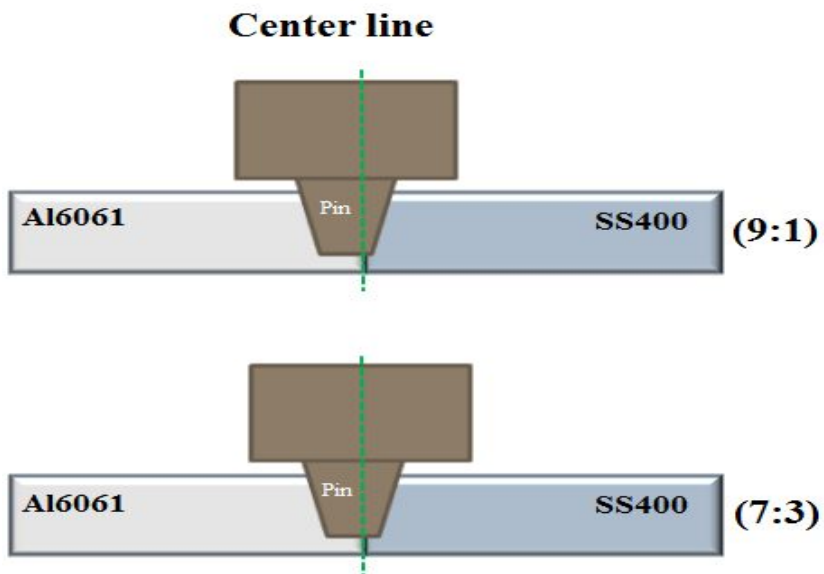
Tool plunge position for TIG assisted FSW welding process
